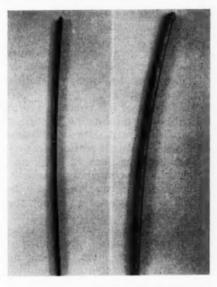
Specimens used to illustrate how unbalanced stresses created by the use of stopoff material may contribute to excessive deformation in heat treatment.
